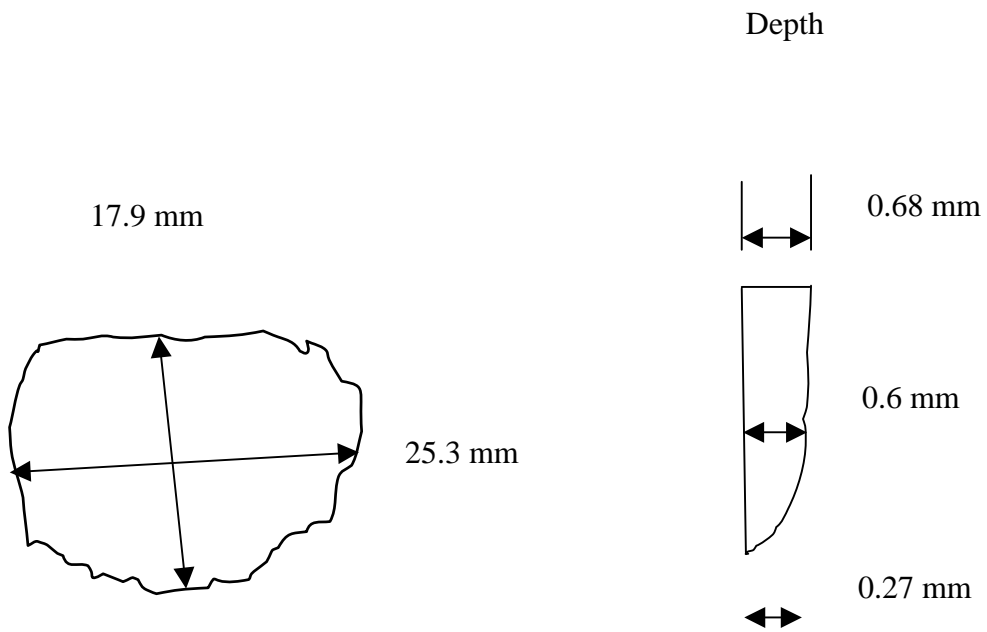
Sketch of #5 corrosion pit dimensional measurement.
